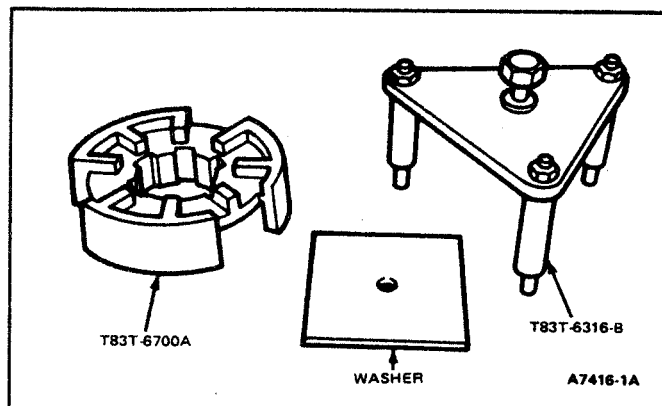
Front Crank Seal Installation Tools—In Vehicle
